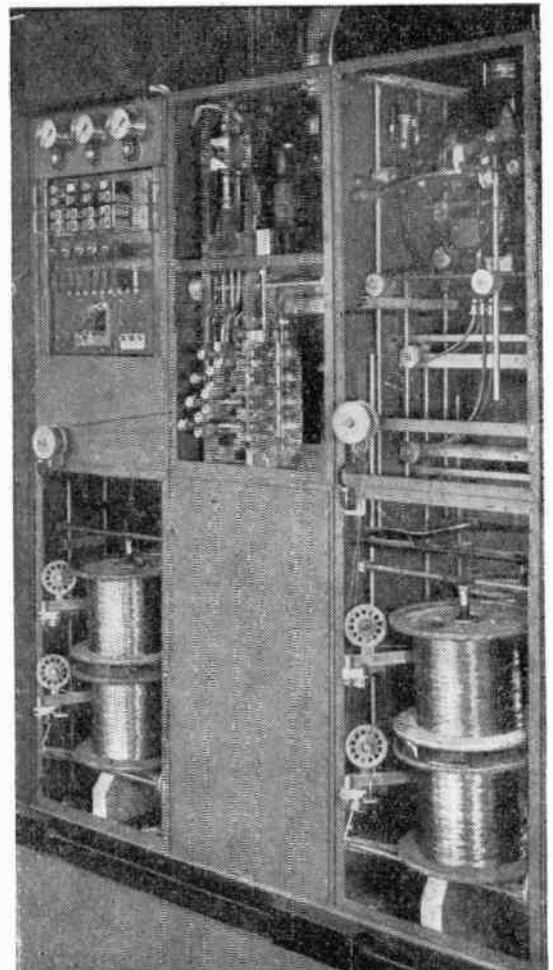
Showing interior of eight-gun metal spraying machine. The spray-guns are arranged four on each side, and one set is shown in centre cubicle. Like all other units in the equipment, this is electronically controlled.
